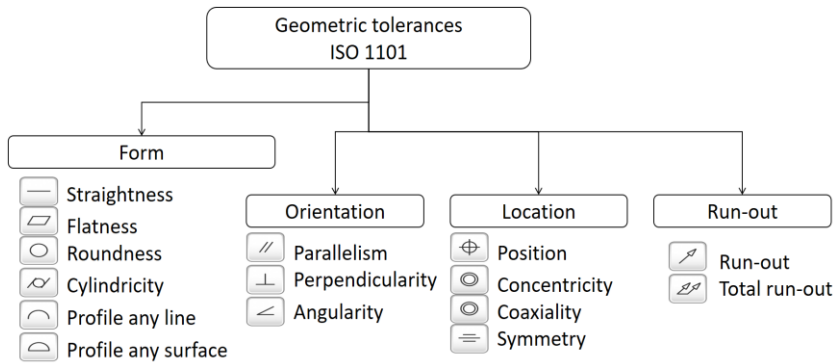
Type of geometric tolerances based on ISO 1101
